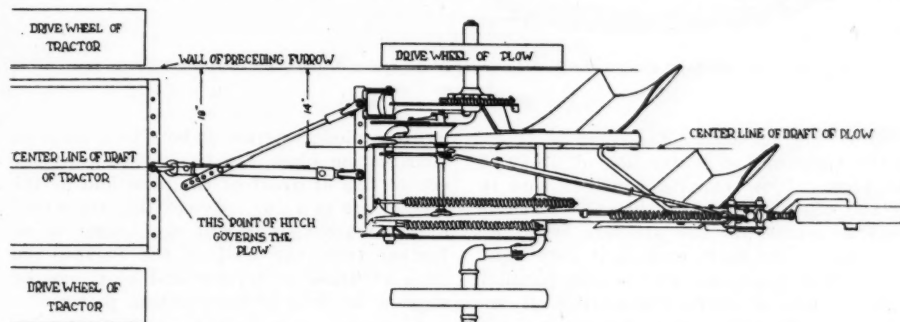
Two-bottom plow attached to tractor designed for one drive wheel to run in the furrow
